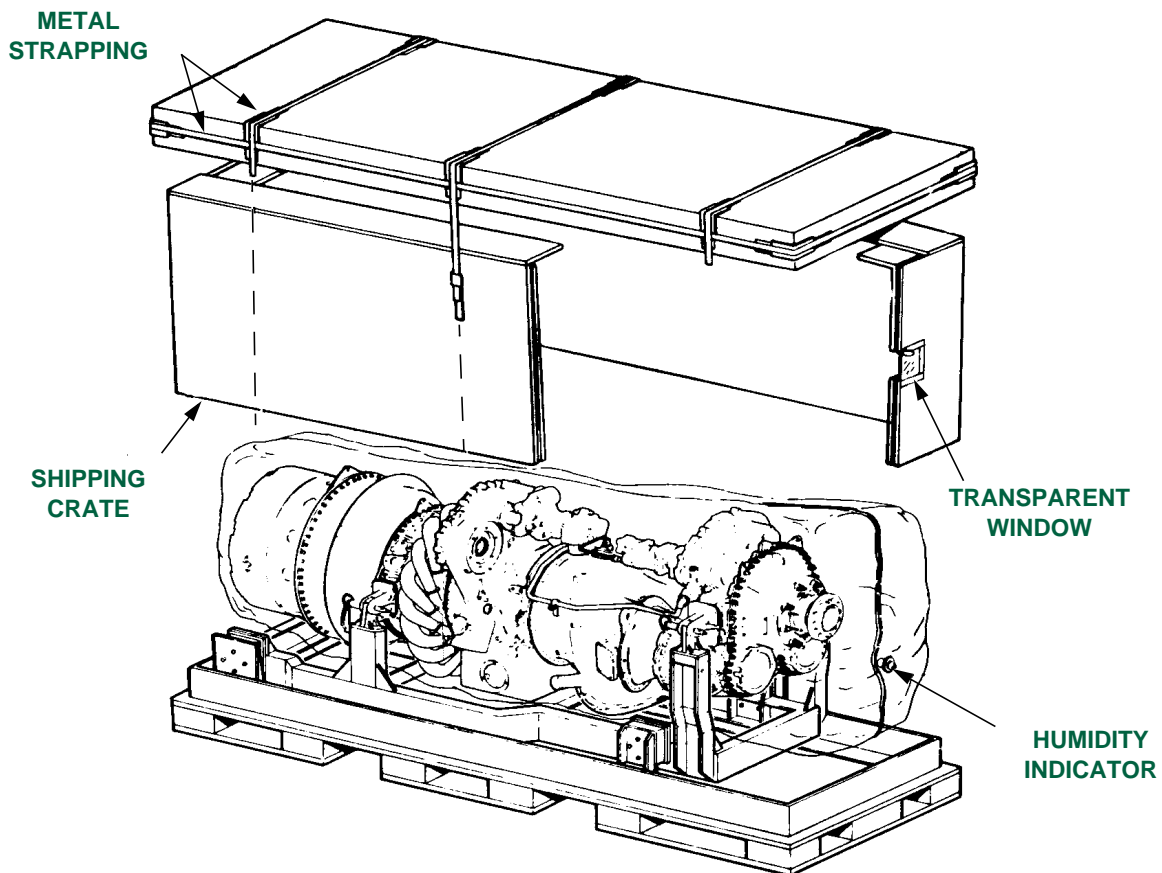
ENGINE IN STORAGE CONTAINER
